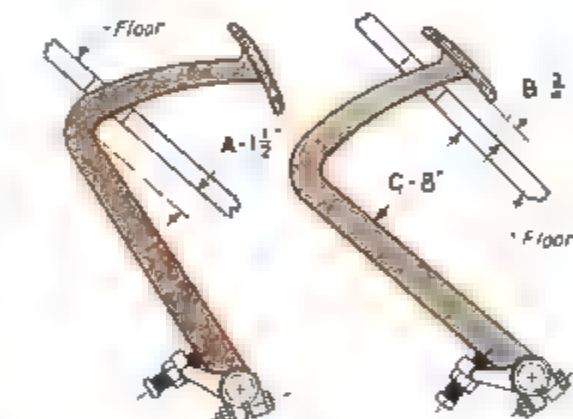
Pedal clearance is important, because insufficient motion may prevent correct clutch action. If dimensions shown cannot be obtained by adjusting clutch (as shown in Fig. 2), then clutch requires relacing.
